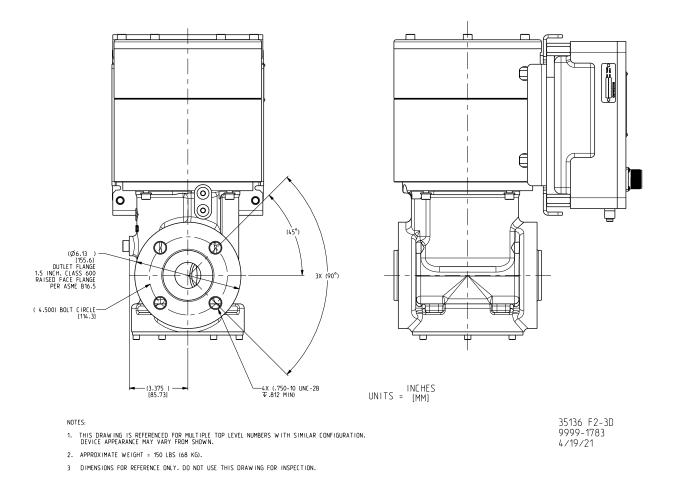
Outline Drawing Stainless Steel GS40 with Connectors
